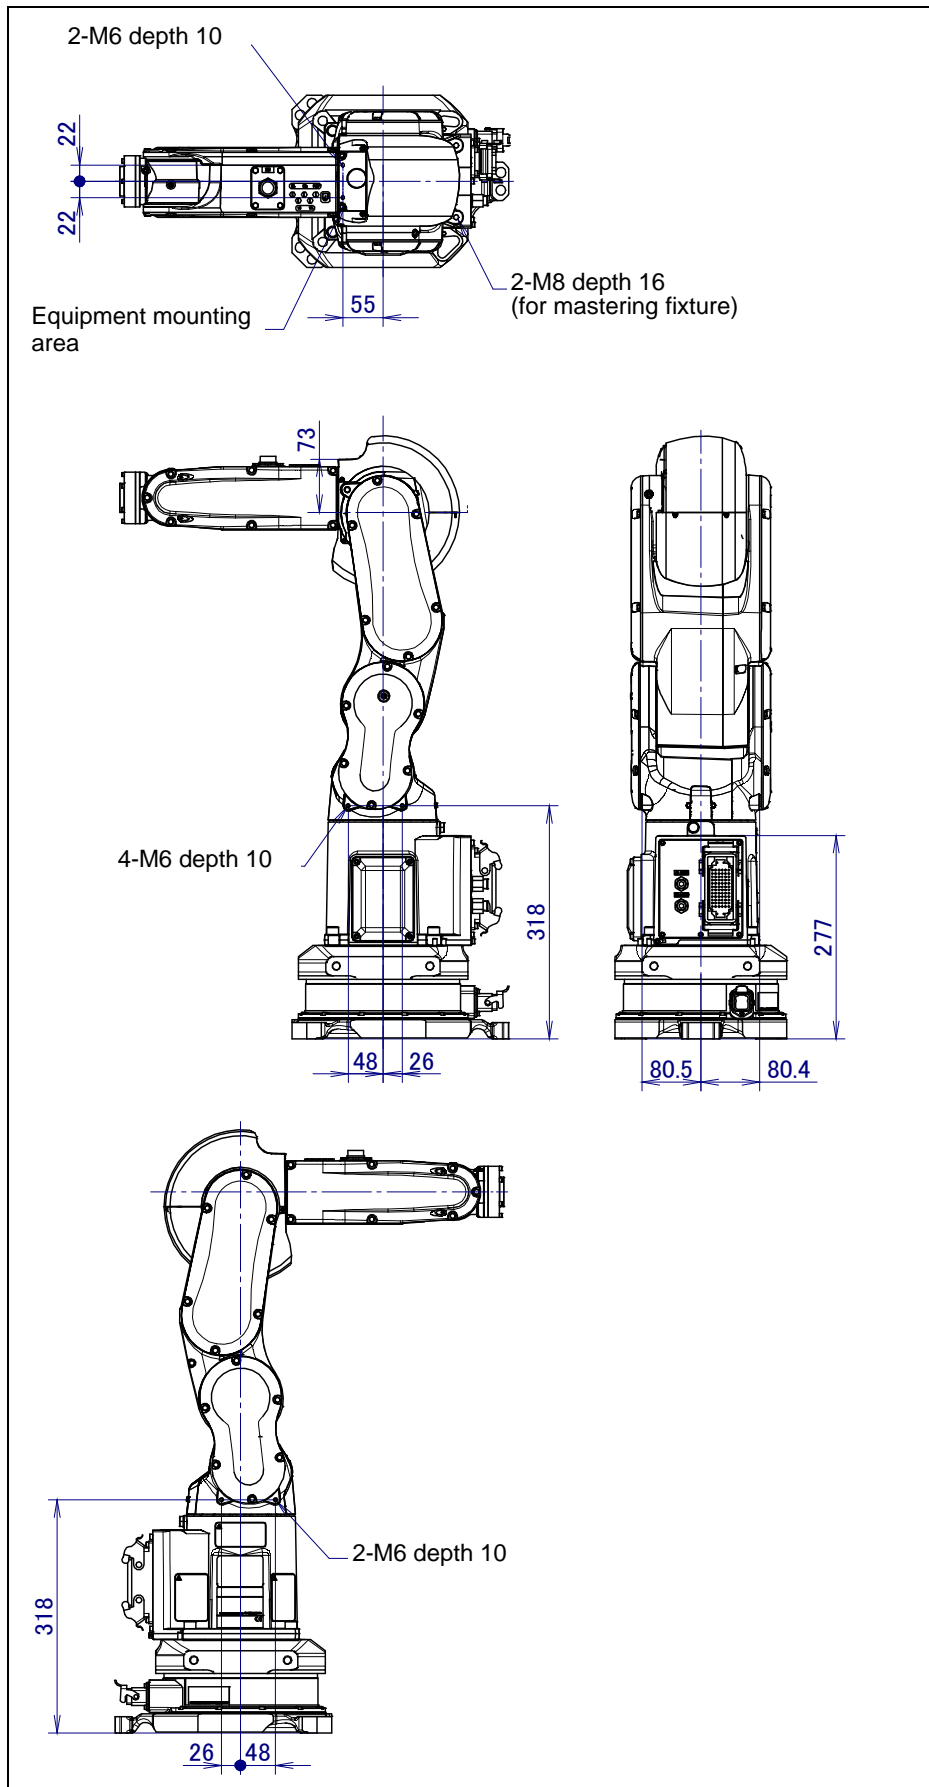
(a) Equipment mounting faces (CR-4iA)
